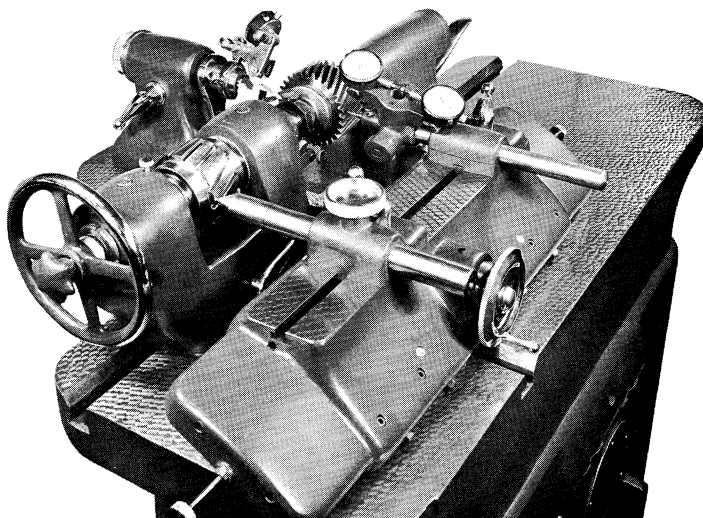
The Red Ring Model LCB-ICB lead comparator and checker with the ICB head mounted on the table behind the work spindle.
